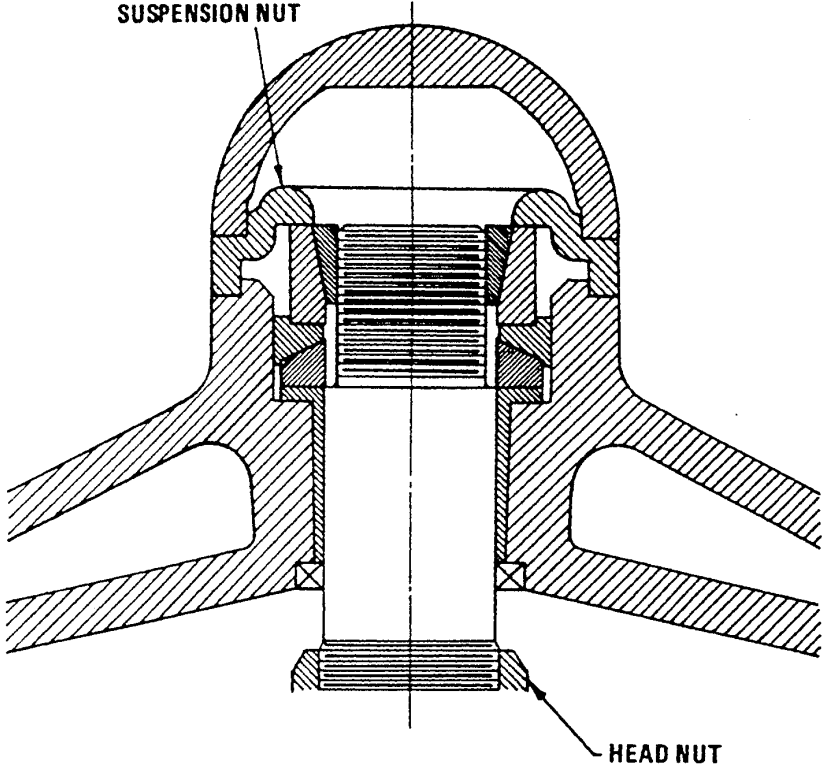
NUT, SUSPENSION AND HEAD NUT.
